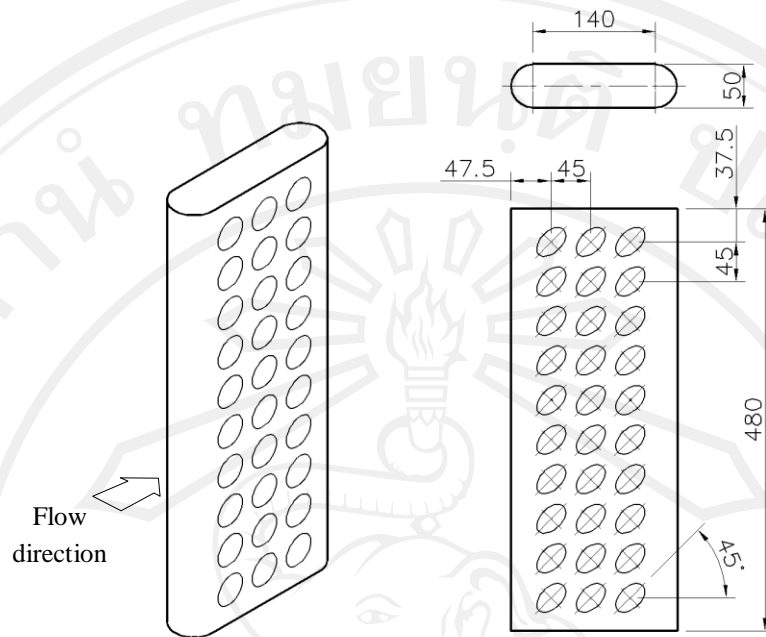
Details of a flat-dimple tube (all dimensions are in mm).
